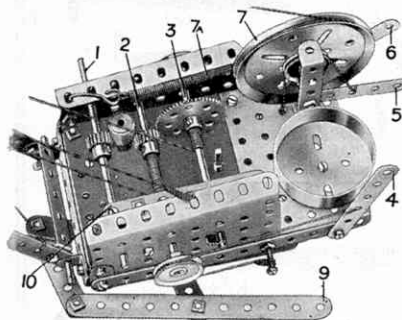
Gearbox of Grabbing Crane showing gears and Motor control.
